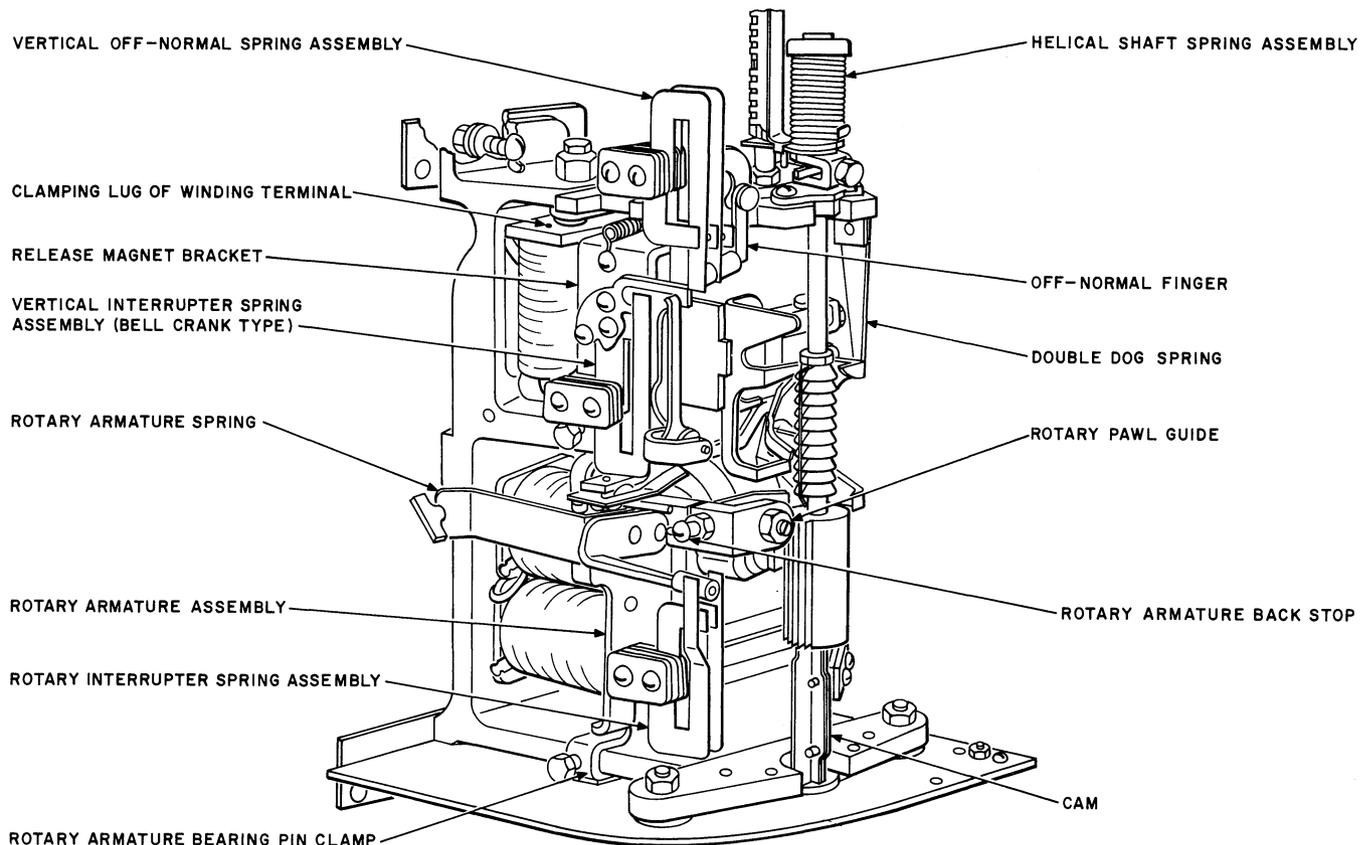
Parts of 197-Type Switch as Viewed From the Left Side
